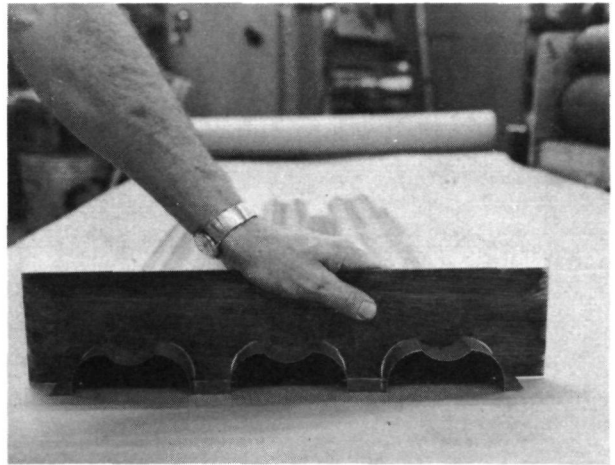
BRAKE FORMING INITIAL TUBE IN
